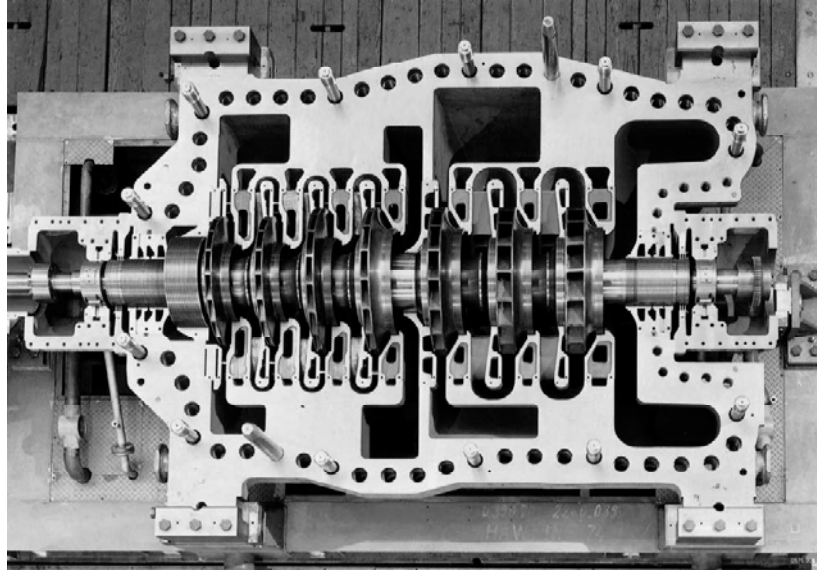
Turbo-Compressor with Narrow Impellers Welded to Cover Discs
